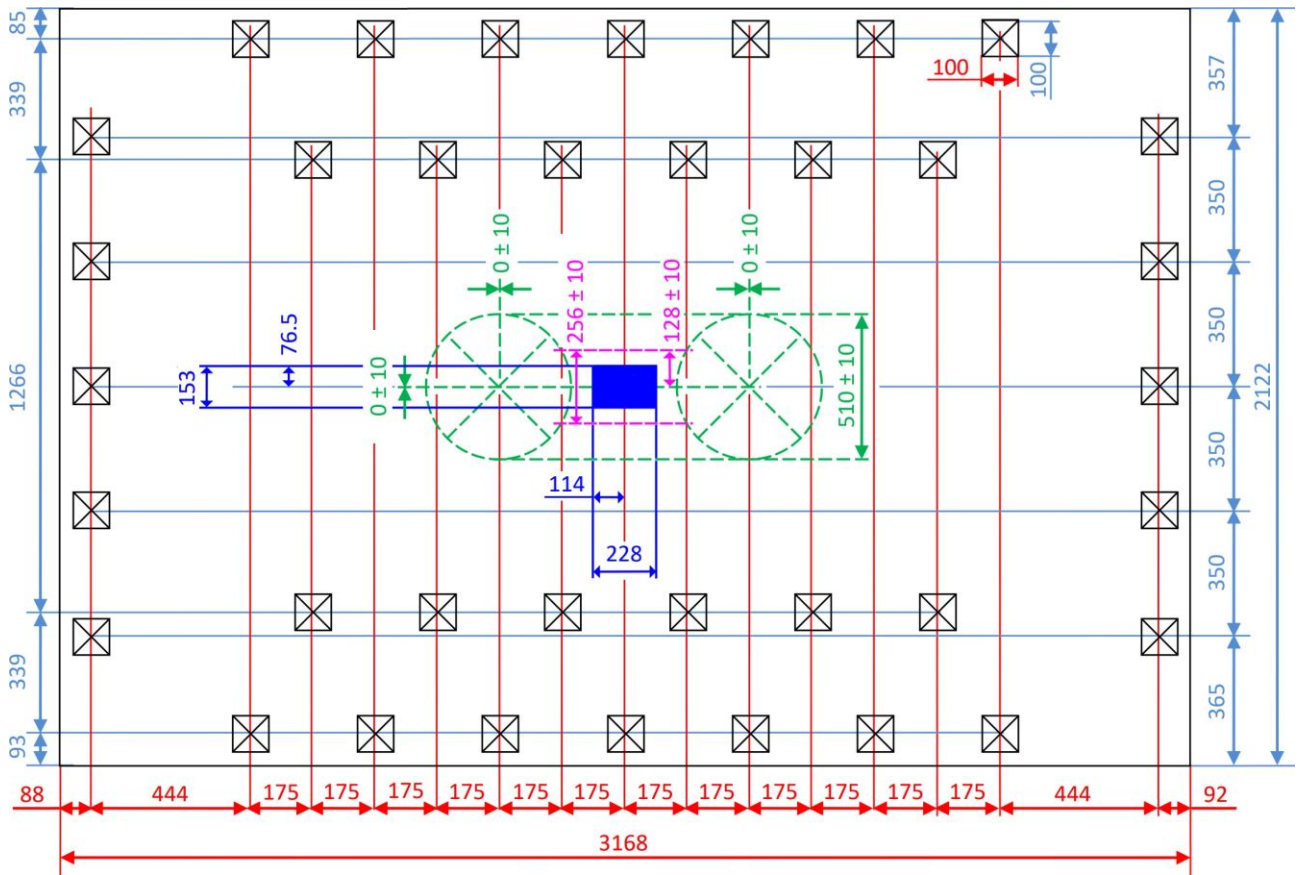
Drawing of the biosensor chip (dimensions in μm).
